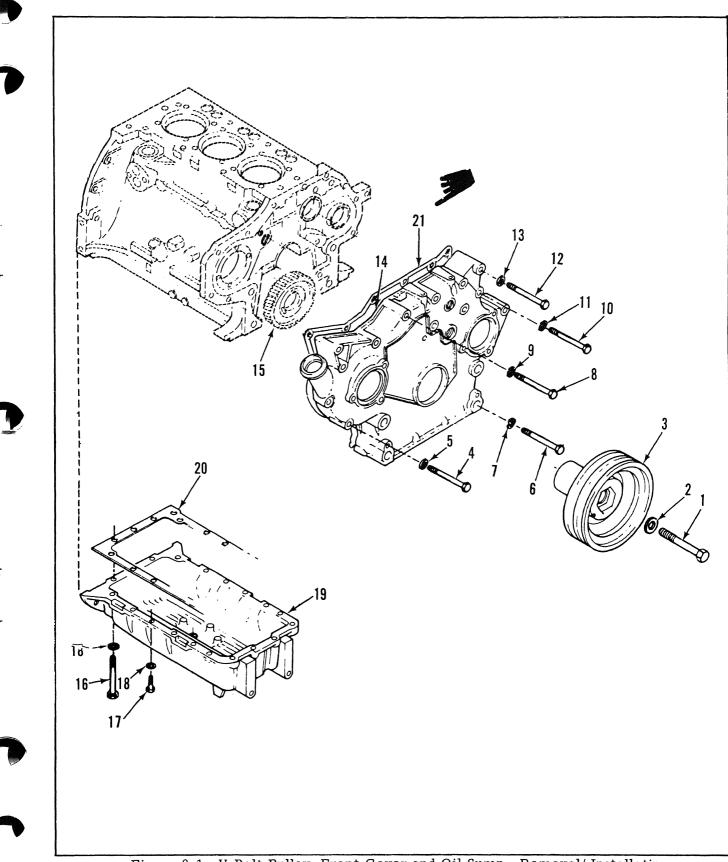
V-Belt Pulley, Front Cover and Oil Sump, Removal/ Installation.
